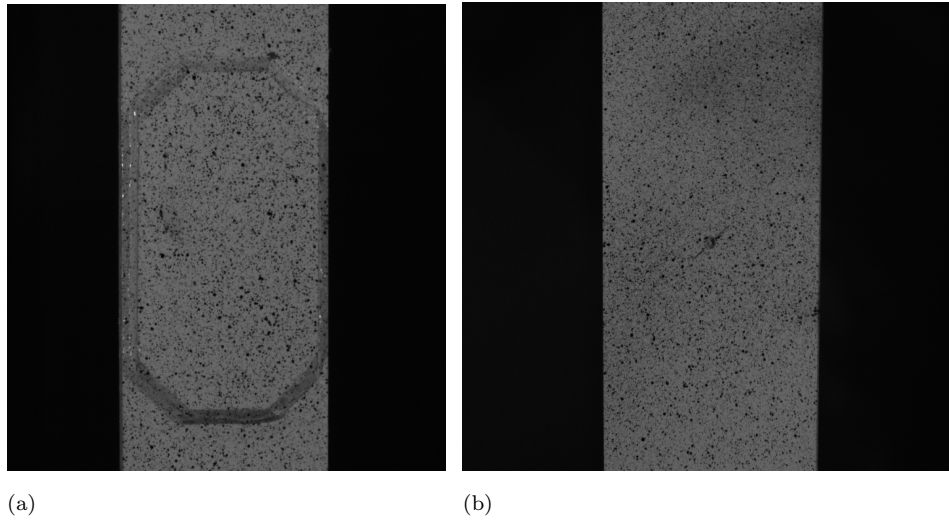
Single sided CFRP patch repaired panel with speckle pattern (a) Front view showing the adhesively bonded patch over the cracked surface (b) Rear view with 45 degree inclined crack
